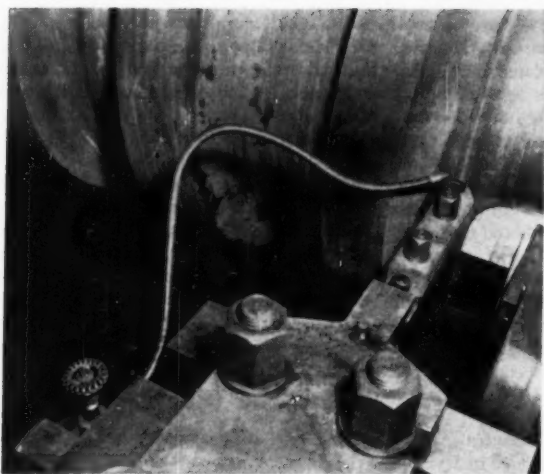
CLOSEUP OF CONTOUR LATHE TOOLHOLDER EQUIPPED WITH TUNGSTEN-CARBIDE BUTTON TOOL FOR HIGH-SPEED METAL REMOVAL
